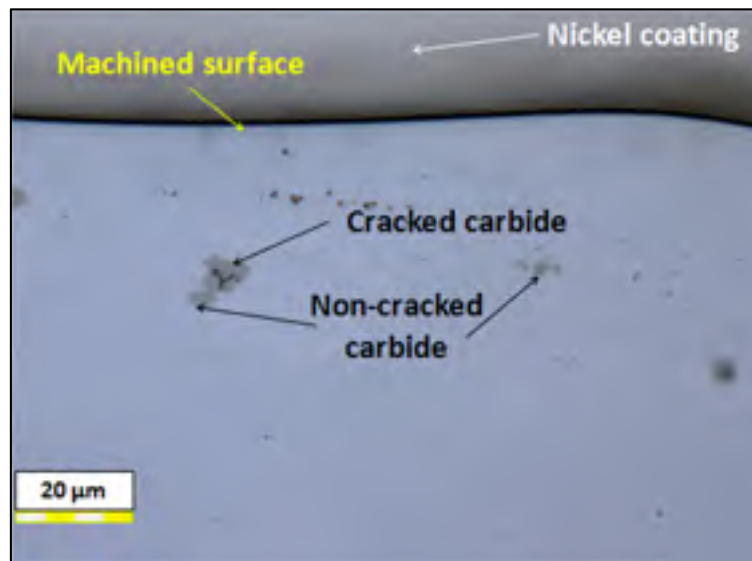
Machined subsurface showing carbide cracking
